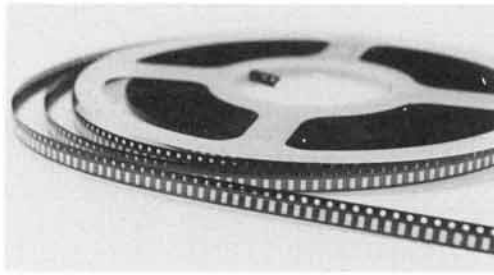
Wire bonding structure type micro fuse of completed reel packing process after inspection resistance.
